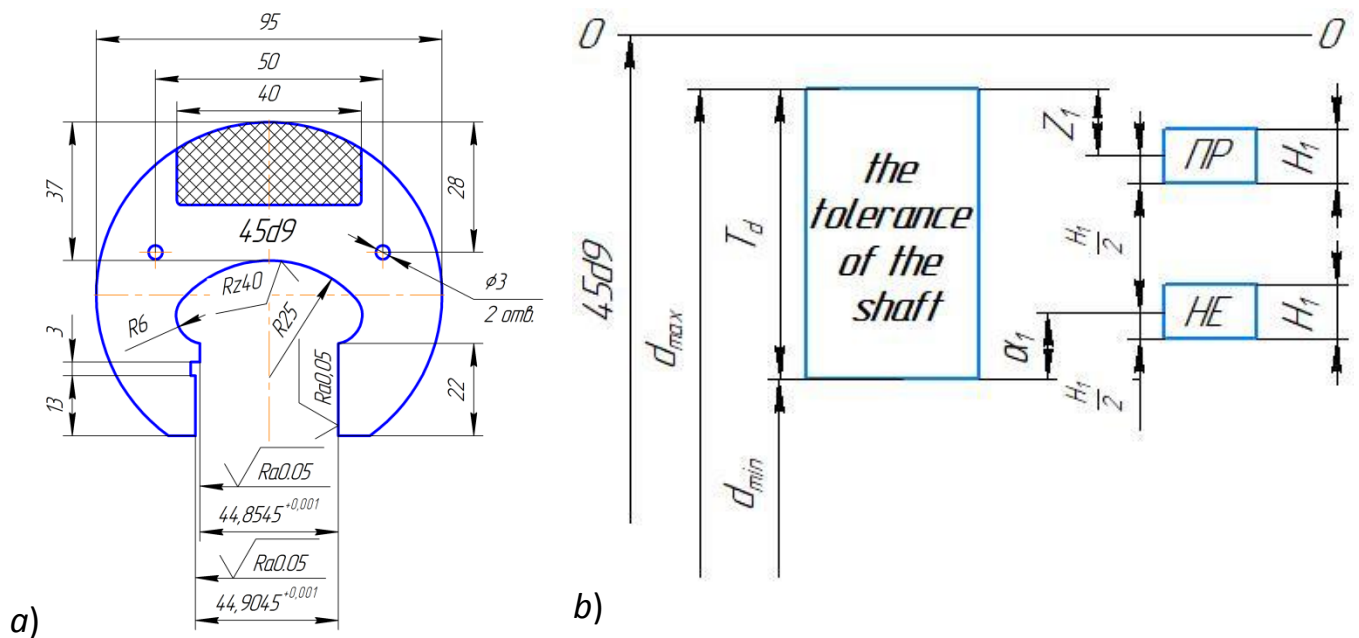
Is a gap gauge and the layout of the tolerance limits
